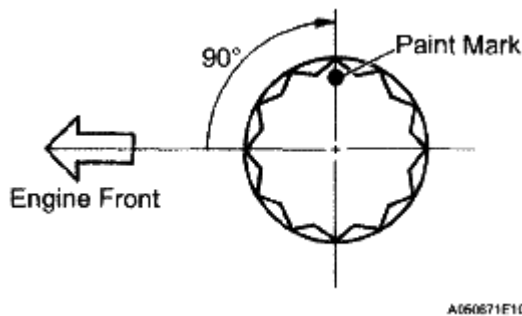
Identifying Bearing Cap Bolt Paint Mark
